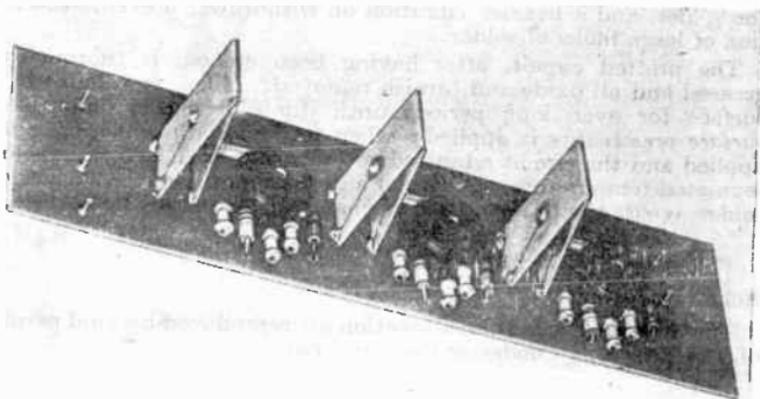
AN I.F. STRIP USING PRINTED CIRCUITRY AND PRINTED COILS.
